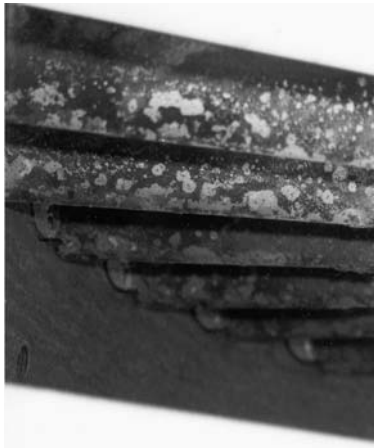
Inlet Guide Vane Deposits with Corrosion Pitting from Airborne Salts.
